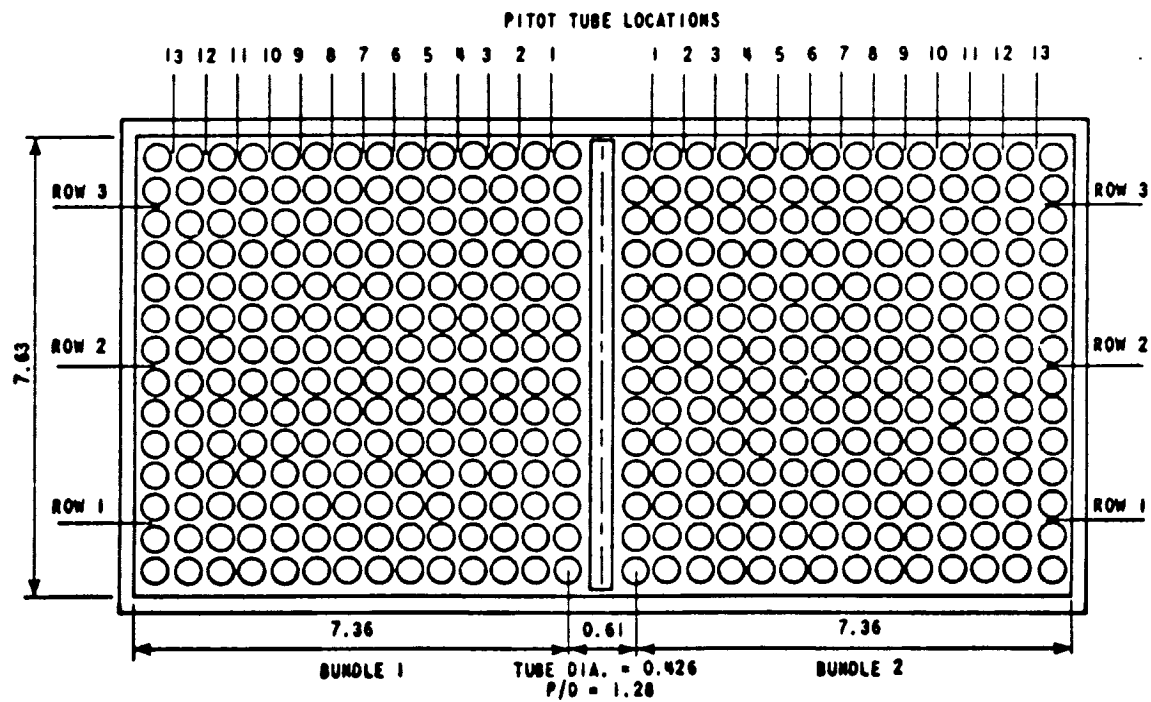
Cross Sectional View of Test Assemblies with Perforated Plate Between Test Assemblies
